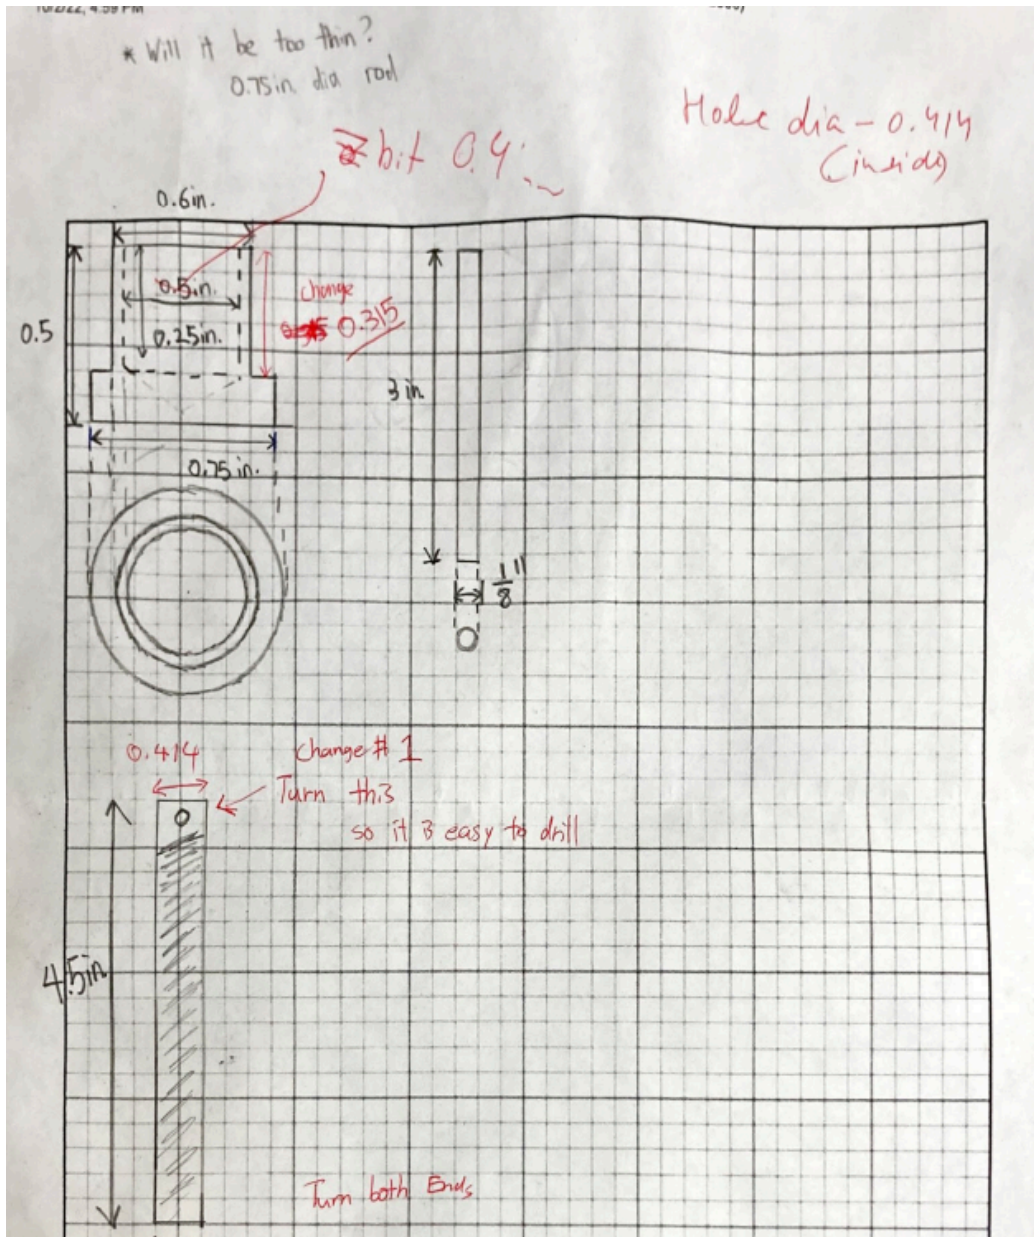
Edited Orthographic Drawing for Handle, Threaded rod and Cap
